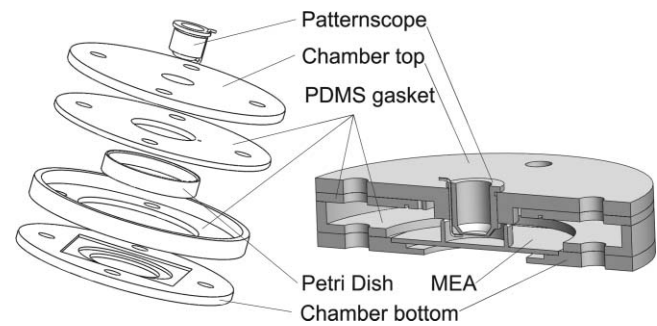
Patternscope cell-deposition chamber design, exposure drawing with Petri dish (left) and assembly drawing with MEA with glass ring (right).
